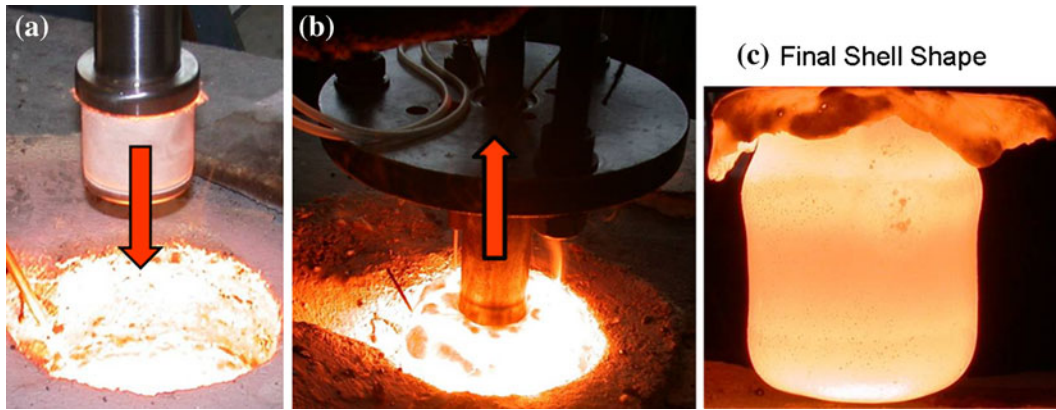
SSCC test: (a) immersion of test body assembly, (b) extraction, and (c) final shape of solidified shell.
